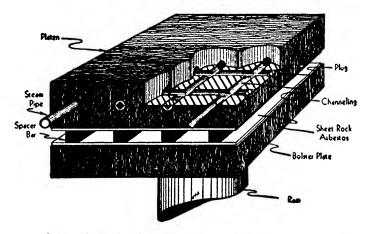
Steam platen showing channeling, space bars, plugs, and bolster plate.
